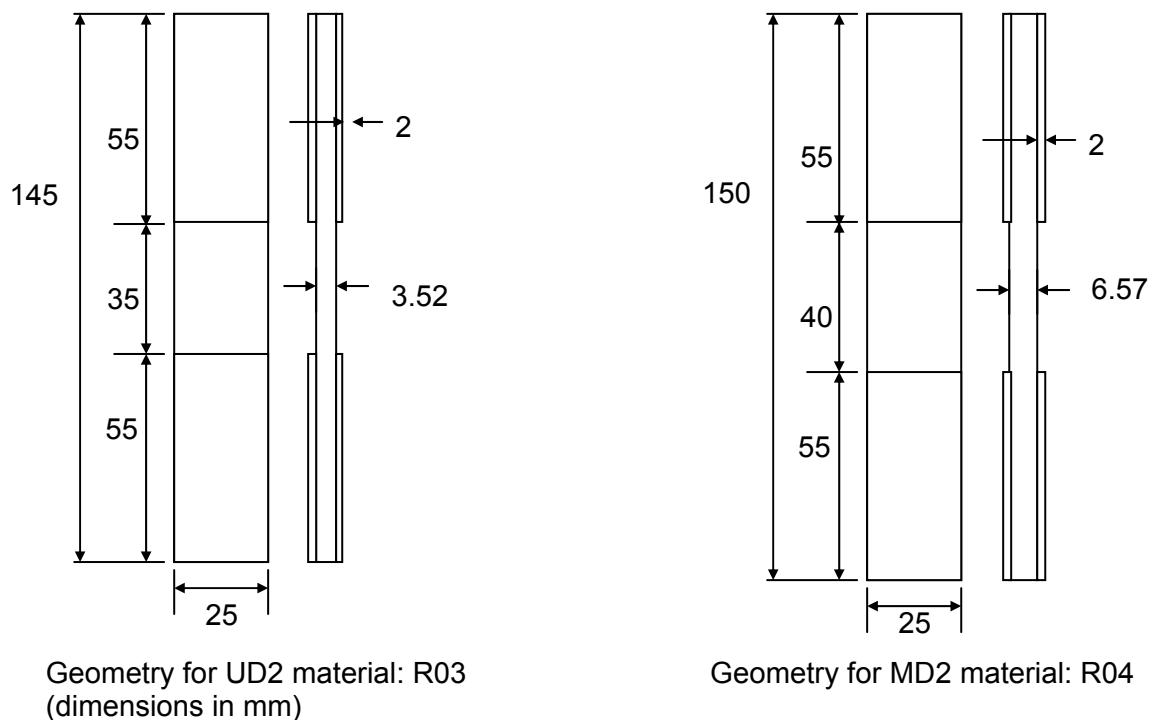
Standard OPTIMAT specimen geometries (dimensions in mm)
